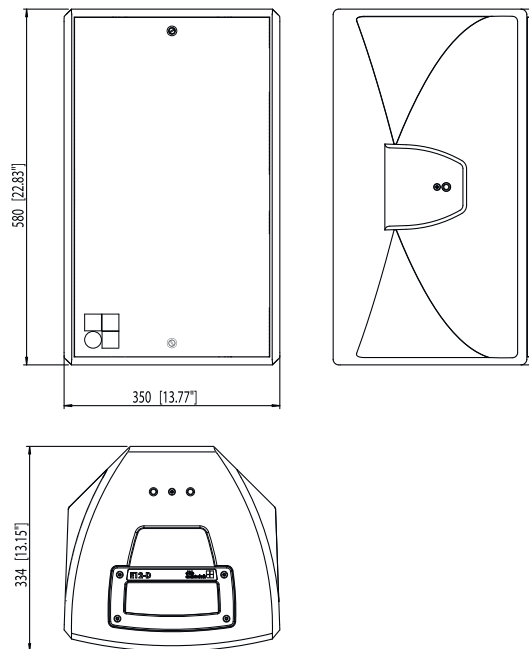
E12, E12-D cabinet dimensions in mm [inch]
